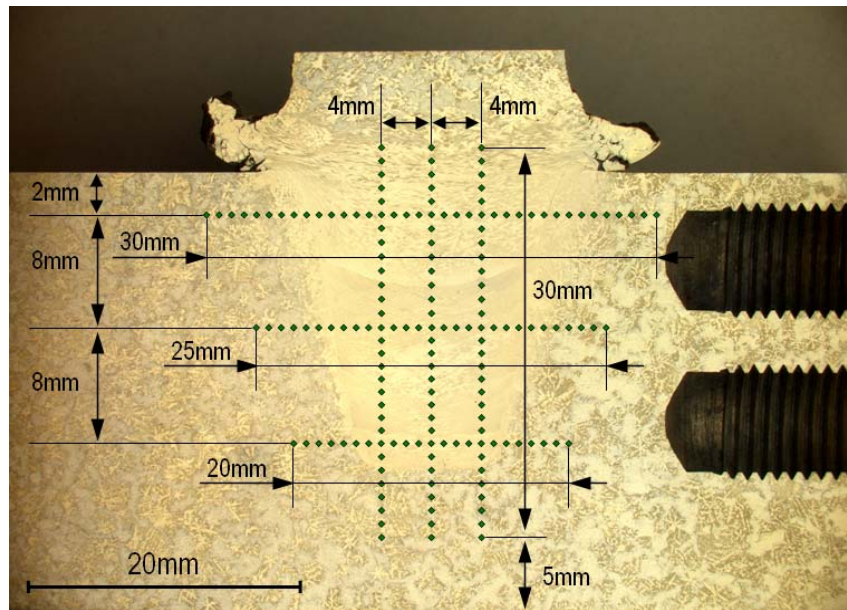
Position of hardness profiles on welded specimens.
